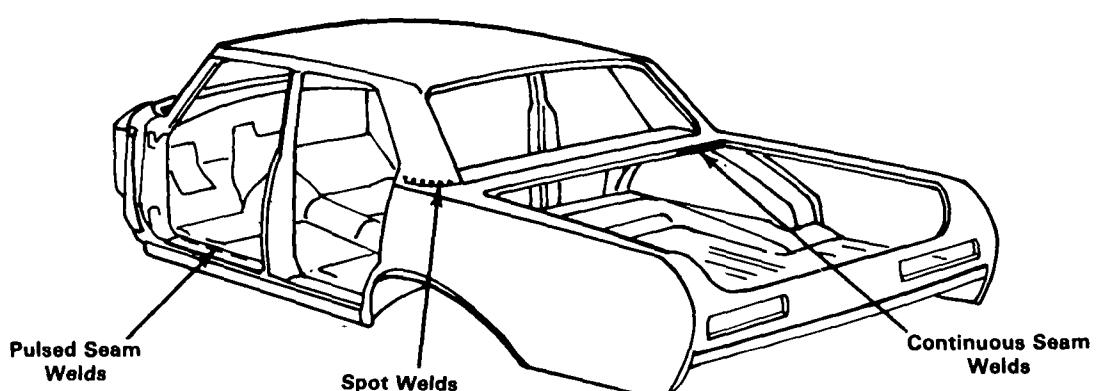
Automotive Body Sections Assembled With Continuous Seam, Pulsed And Spot Welds
